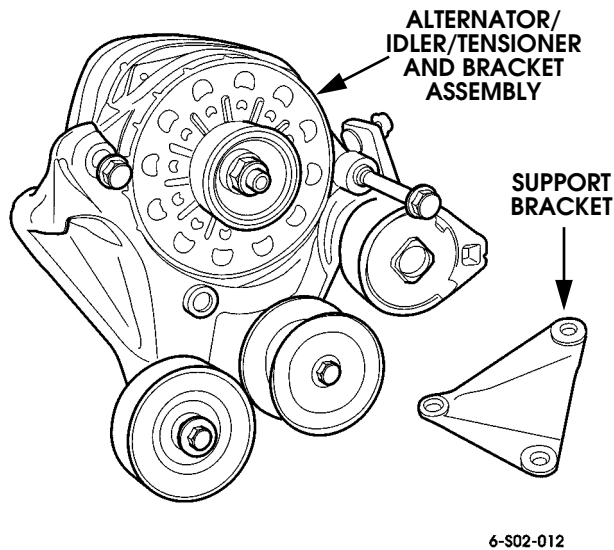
Alternator, Pulleys, and Bracket Removal/Installation
